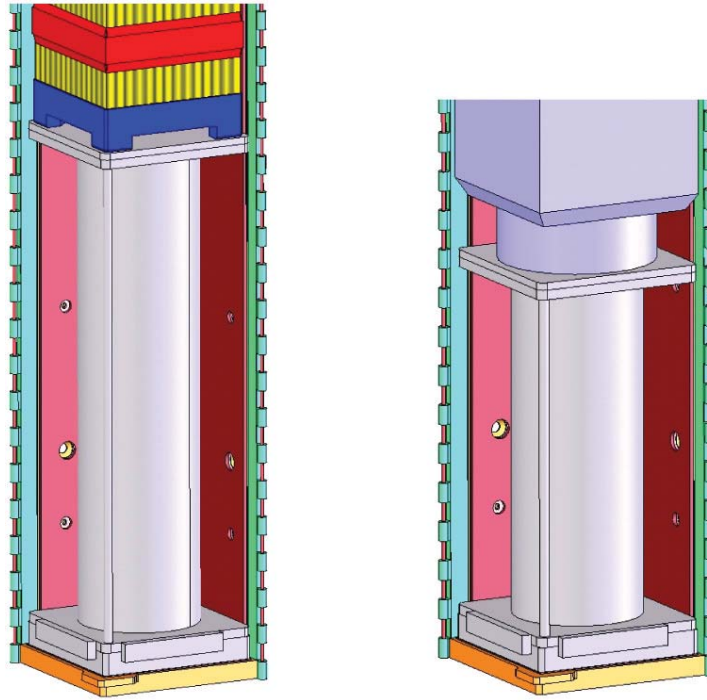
D Axial Spacer Assembly (length depends on fuel assembly type)
